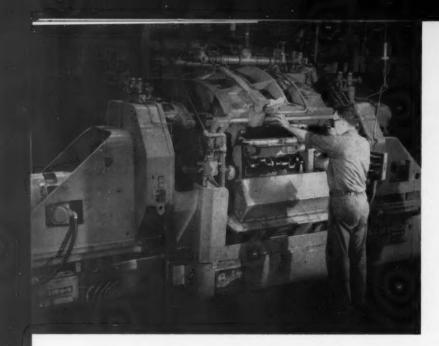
Both ends of crankshafts are drilled, counterbored, spot-faced, recessed, chamfered, reamed, or tapped on this six-station, two-way, trunnion type machine.
